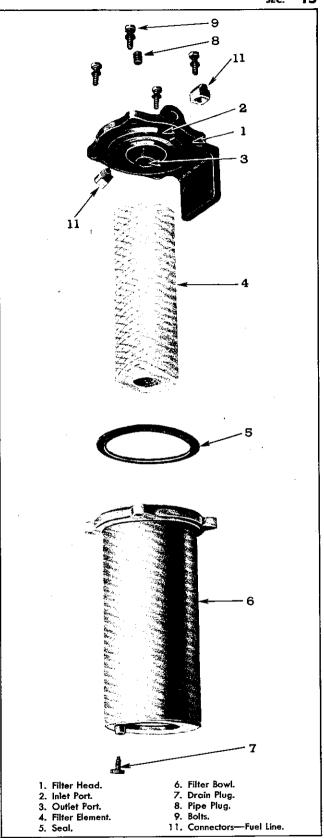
Primary Fuel Filter Details and Relative Location of Parts.
